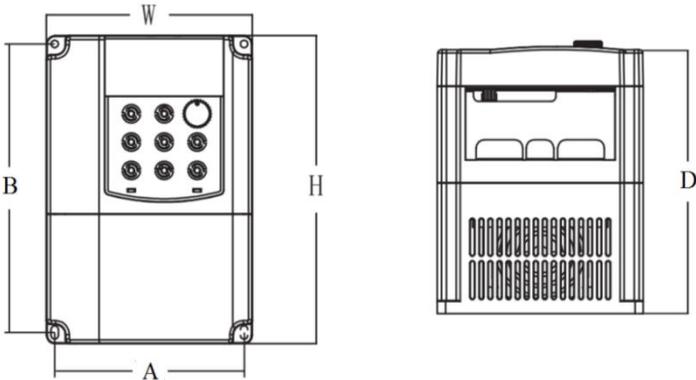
Physical appearance and overall dimensions of the H300 (sheet metal housing)
